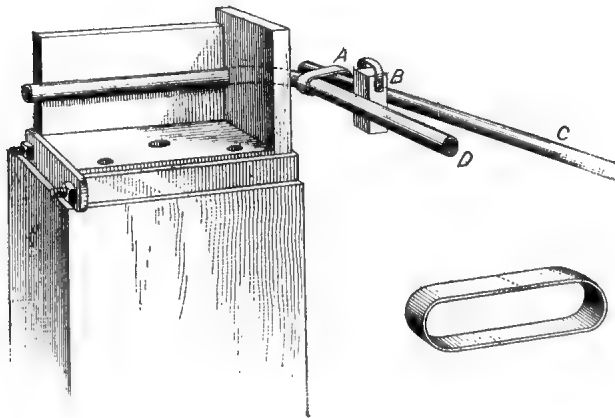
Bending Block Arranged for Use with Lead Piece and Back Plate.
